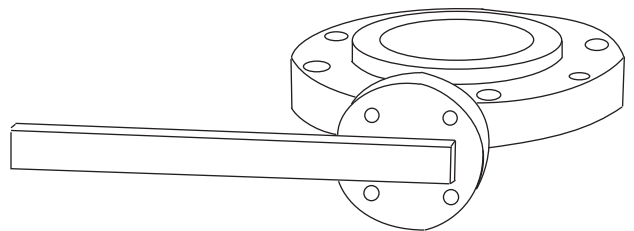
Butterfly Valve Closed (DX Cooler Units)
